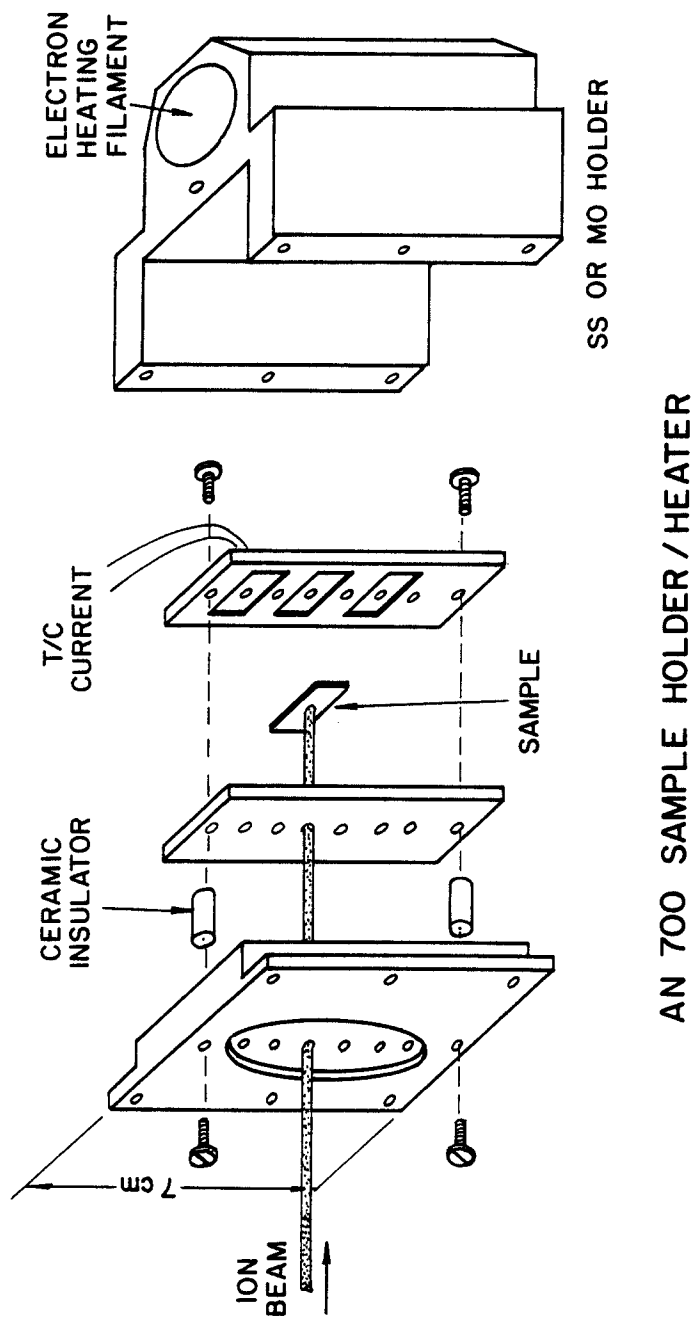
Exploded view of sample holder for the 700 kV Accelerator Facility.
